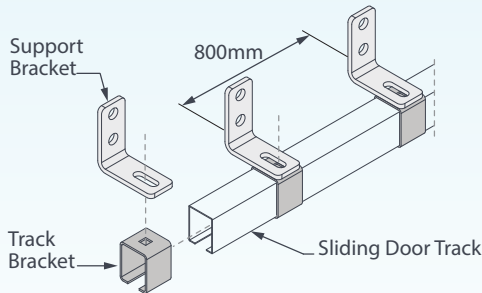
SINGLE SUPPORT BRACKET
